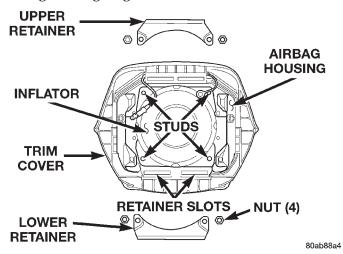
Airbag Trim Cover Retainers Remove/Install
